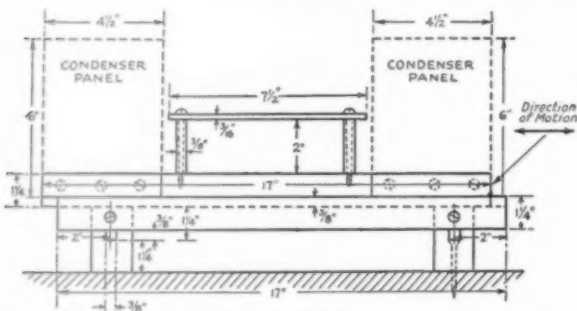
A FRONT ELEVATION OF THE COMPLETED CHASSIS SHOWING ALL DIMENSIONS
